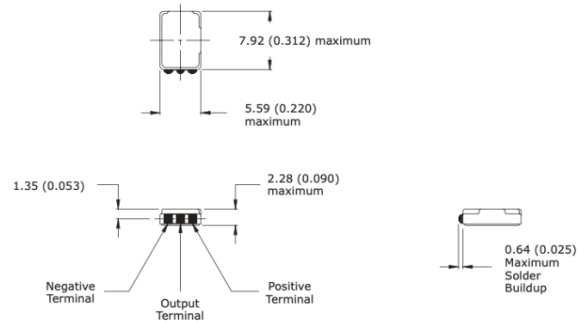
Wire Hookup and Outline drawing of the BU series accelerometer used.
